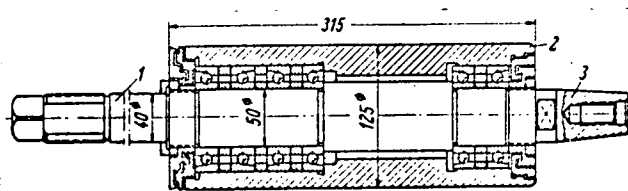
Precision tool spindle. 1. Tool mounting. 2. Housing. 3. Cone for drive pulley.
